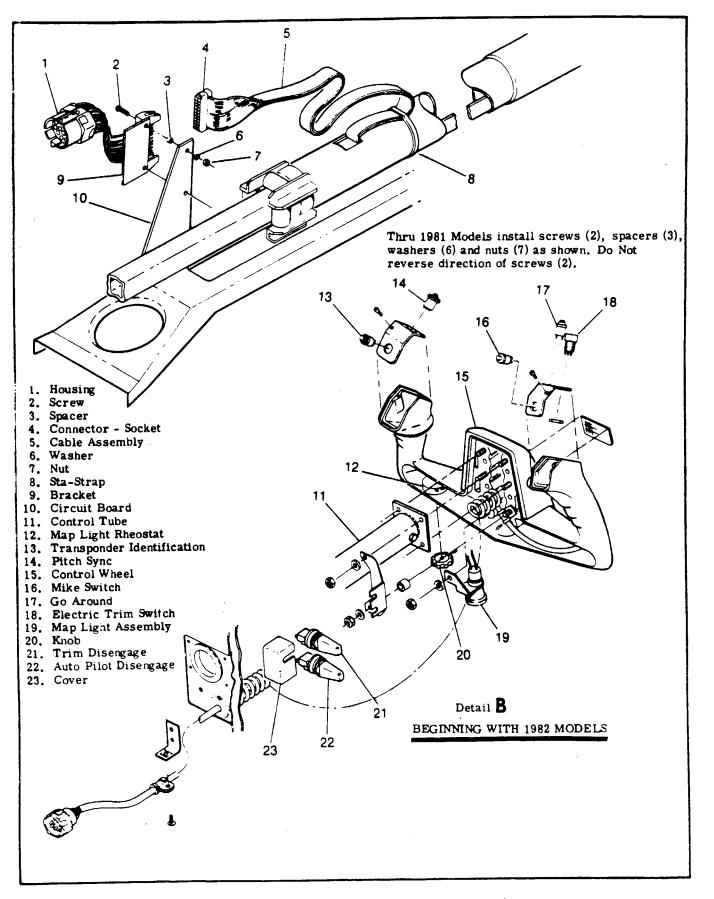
Control Column Installation (Sheet 4 of 5)
